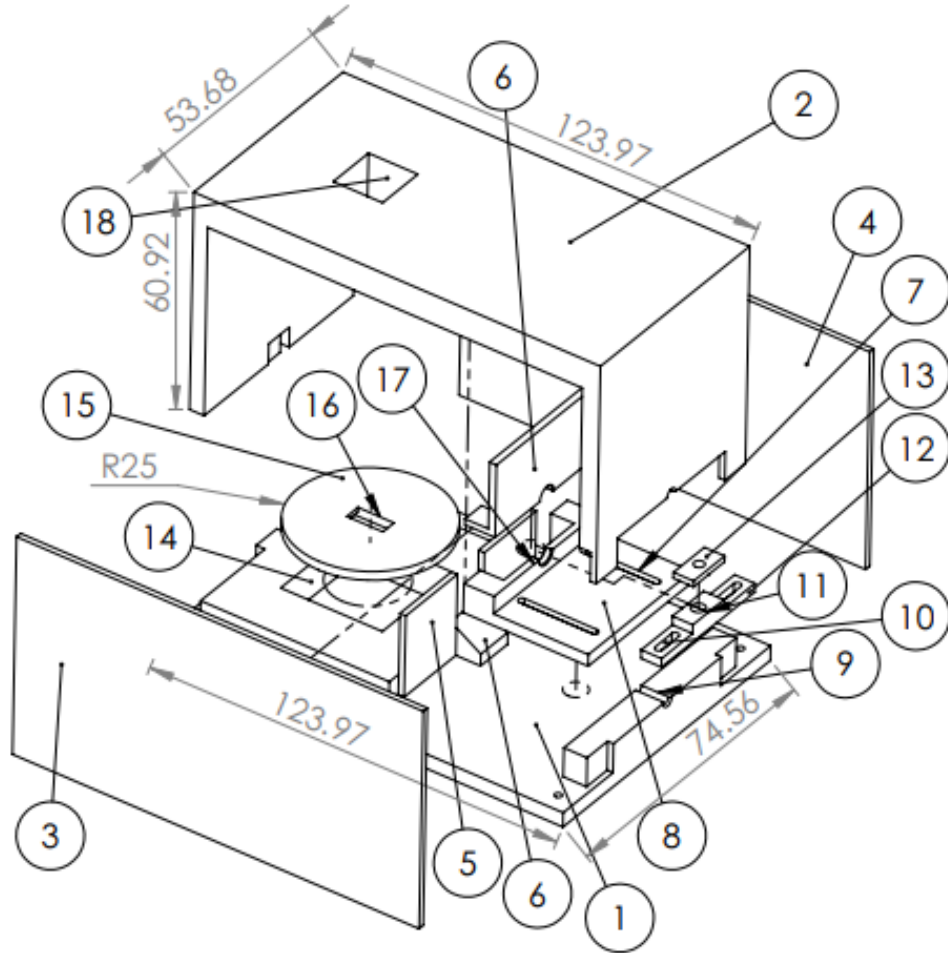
Assembly drawing of the proposed instrument designed by Solidworks software. 123.97 mm x 74.56 mm x 60.92 mm is its sizing.
